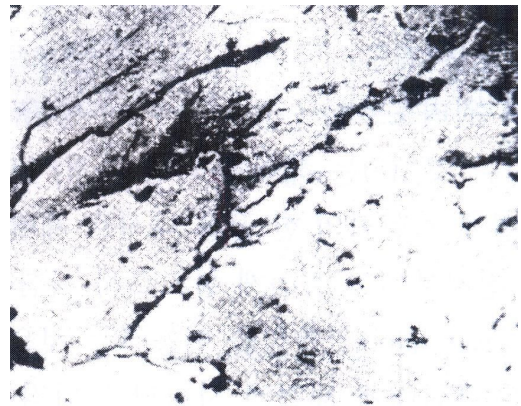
Impact fracture of Ni-Cr steel to -193°C
